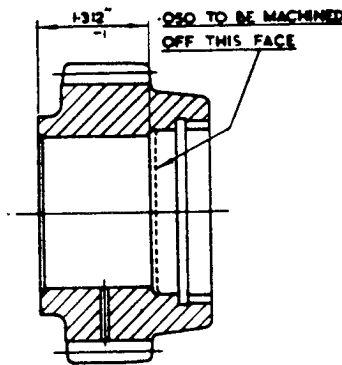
TO MODIFY 3RD SPEED GEAR RG.100 TO RG.8459.
